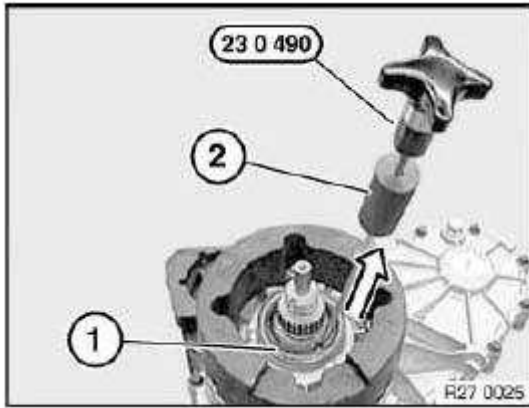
Radial Shaft Seal, Impact Weight And Special Tool (23 0 490)
